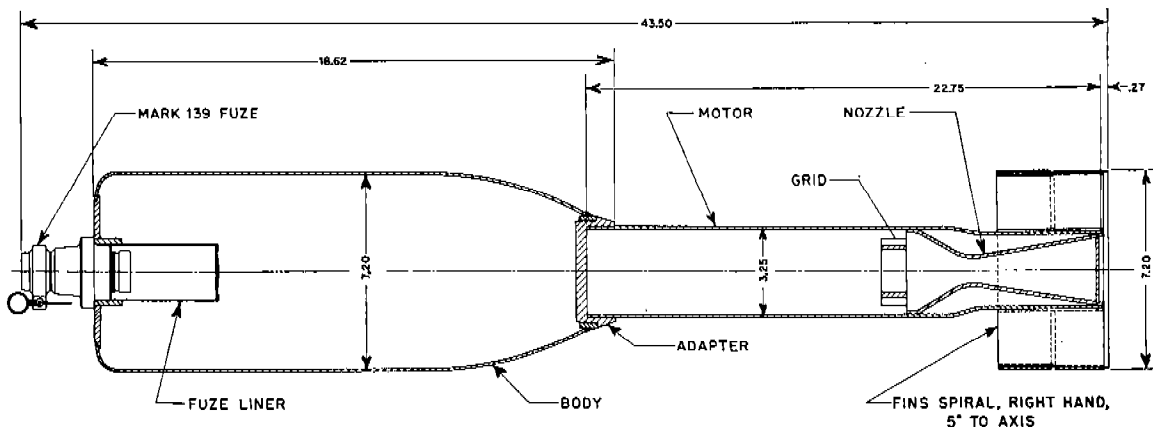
Section drawing of one of the VAR series. Others differ only in length of motor tube and nozzle diameter.
